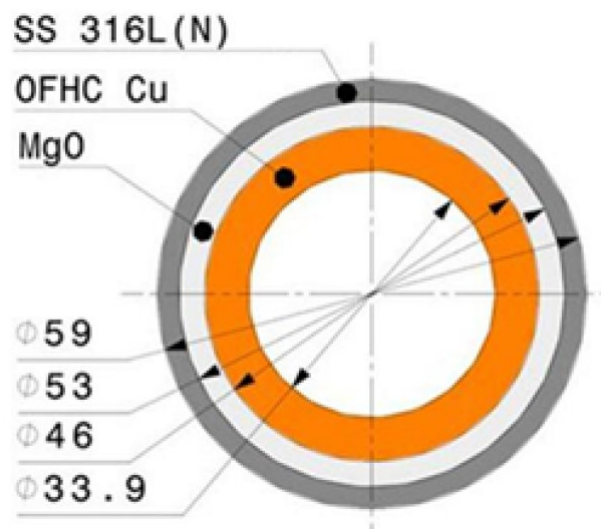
IVC conductor cross-section dimensions (in mm). Thickness: SS Jacket (316LN) = 3.0 mm,
